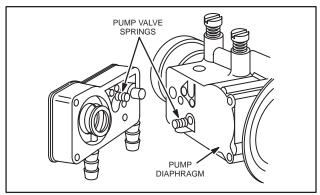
PUMP SPRING LOCATION (VALVE FLAP BENT DOWN FOR CLARITY)
